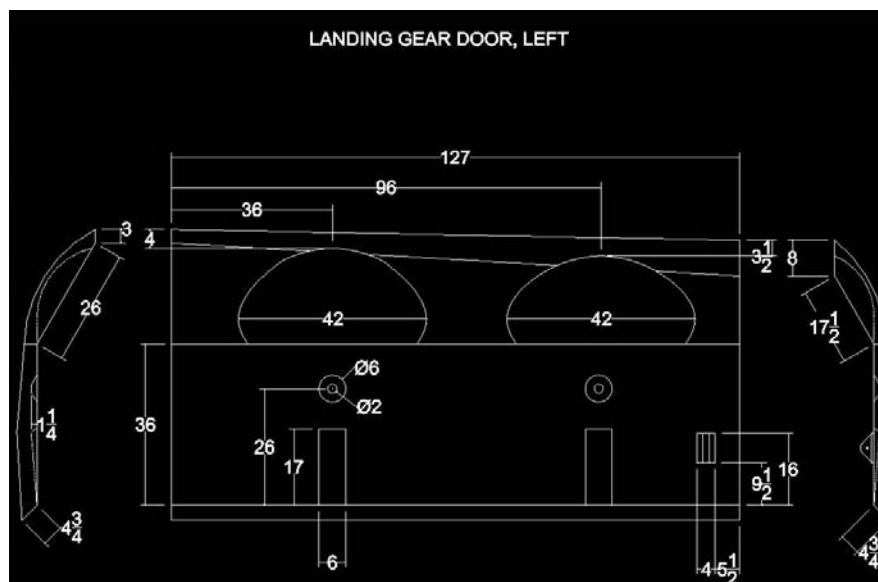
Dimensional Drawing of KC-135 Landing Gear Door
